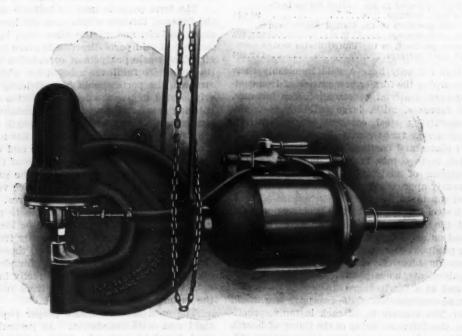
One Form of the Punch with Auxiliary Stroke.
